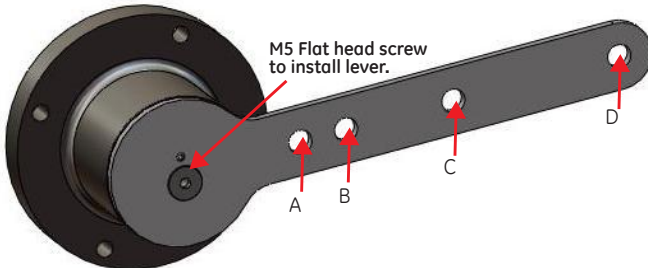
Magnet Holder and Standard Lever for Reciprocating Valves
